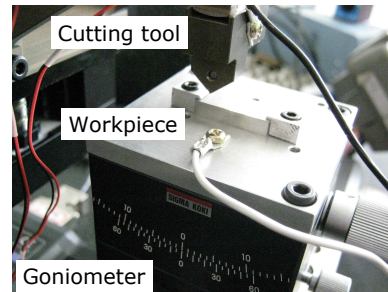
Experimental setup for measuring impedance between cutting tool and workpiece
